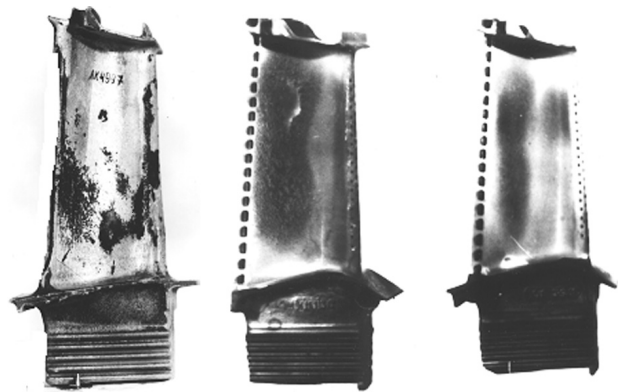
Turbine blades without (a) and with a thermal-barrier ceramic coating (b, c) after comparison tests in an impeller of an aircraft gas-turbine engine: b – view of the blade before carbon deposit removal, c – view of the blade after carbon deposit removal
